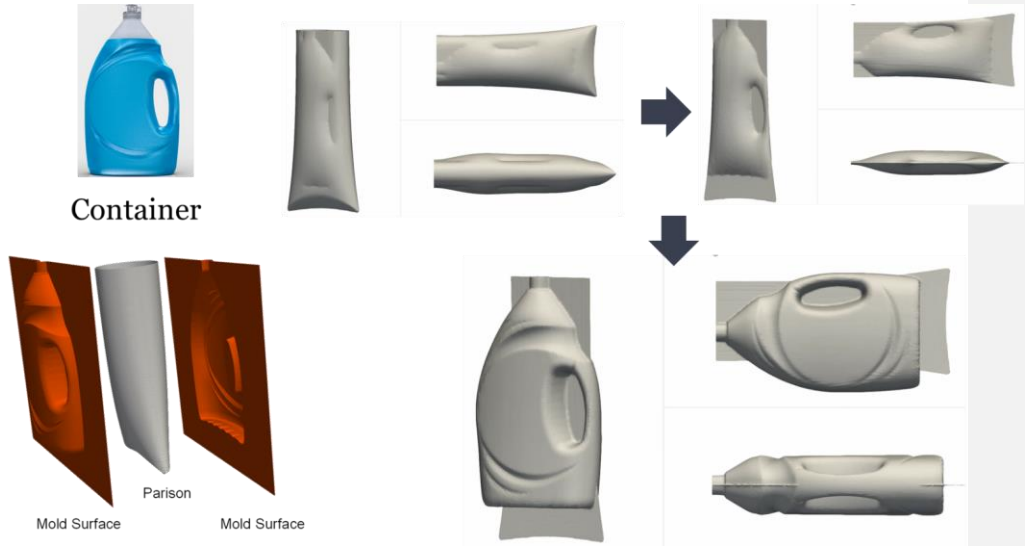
Extrusion Blow Molding - Mold Clamping and Inflation phases
